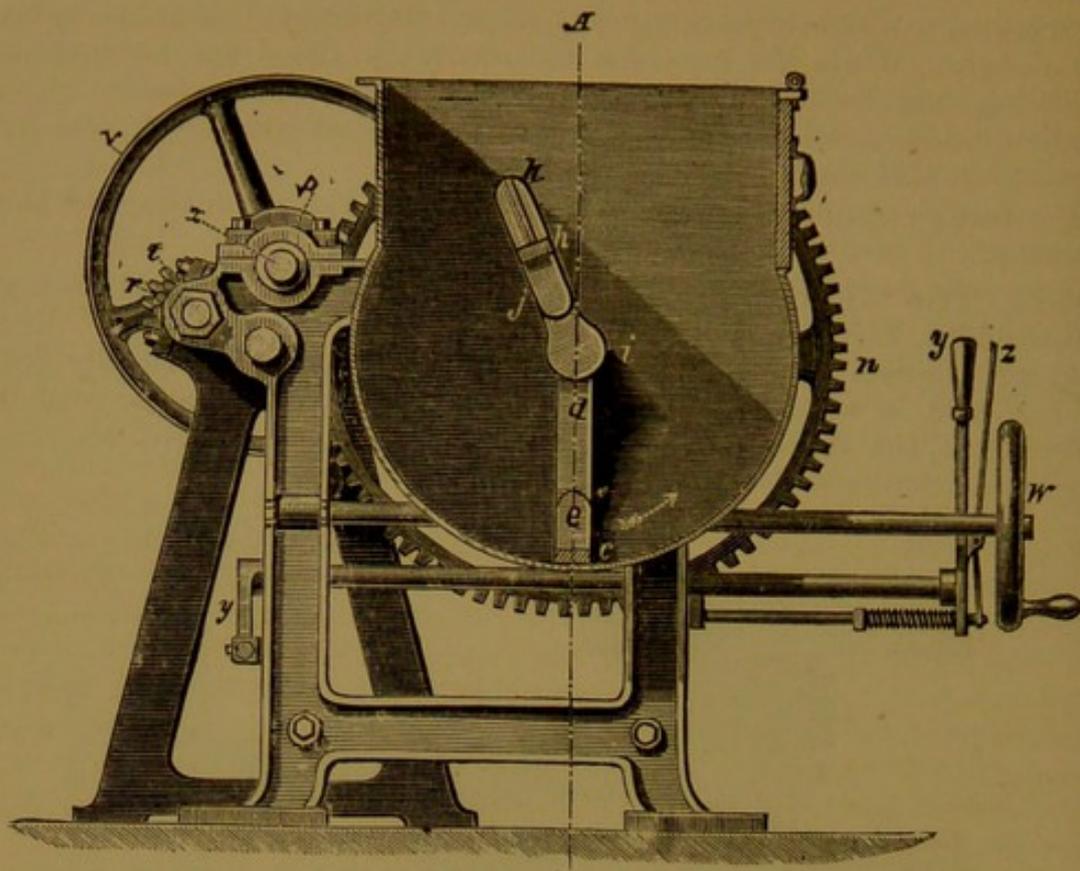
TRANSVERSE SECTION THROUGH THOMSON KNEADING MACHINE.
